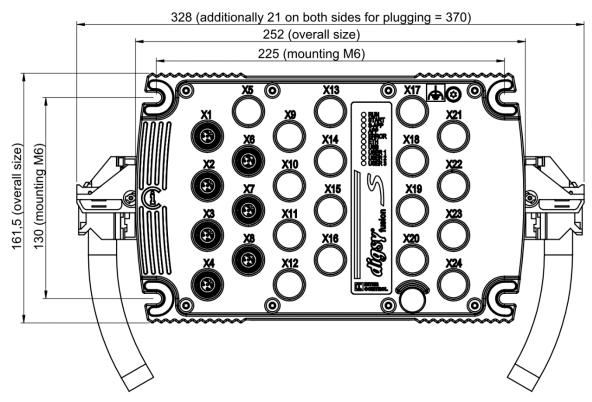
Dimensions of the digsy®fusion housing – top view
